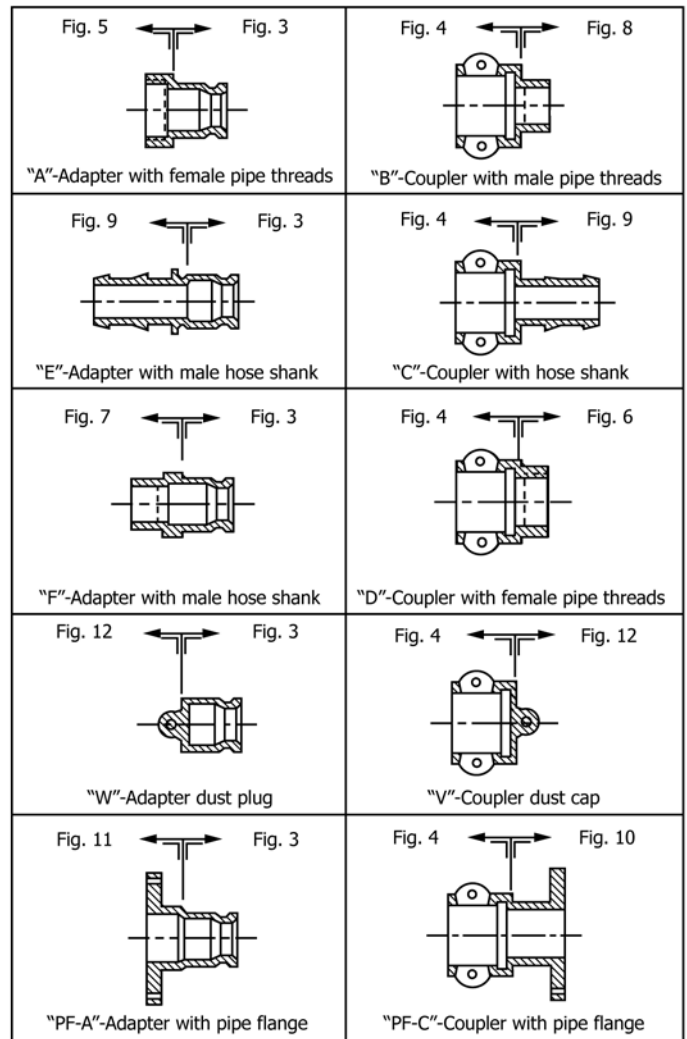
Adapter/Coupler Types (End Dimensional Data Located in Tables Indicated by Arrows)
